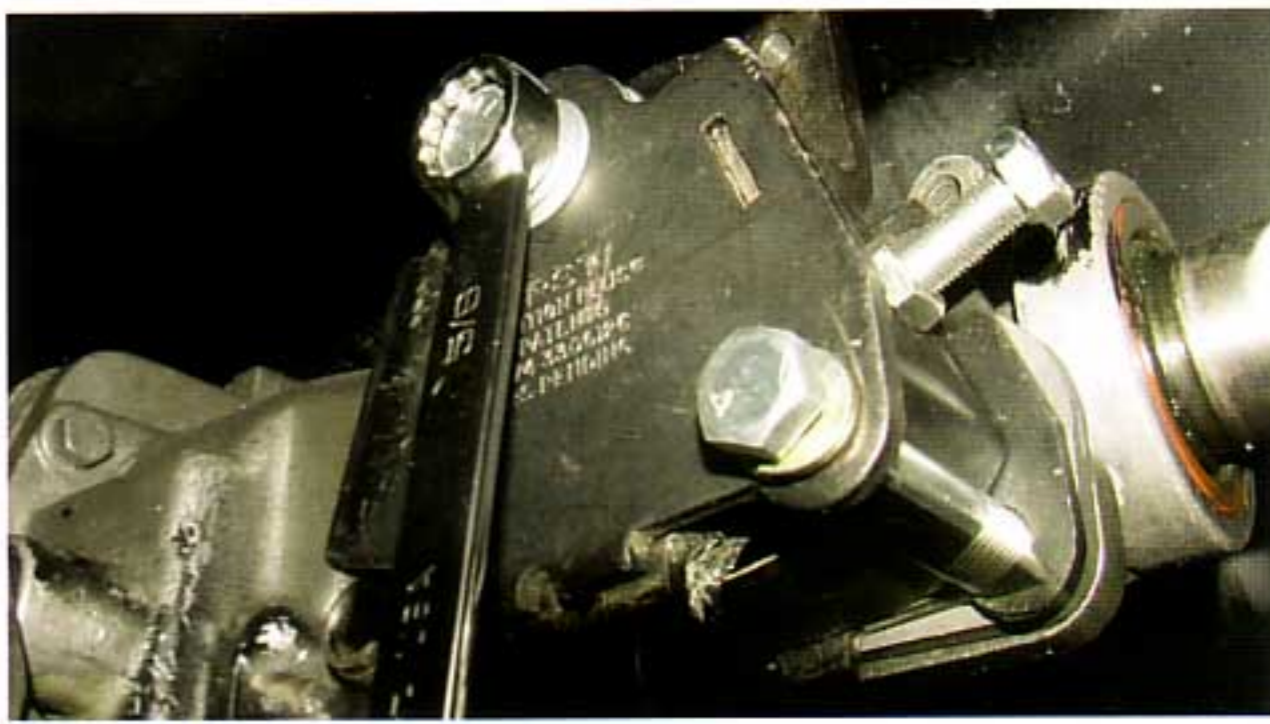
Note the spacer between the shifter body and adapter. We then tightened the bolts with a 5/8" wrench and 9/16" respectively.
